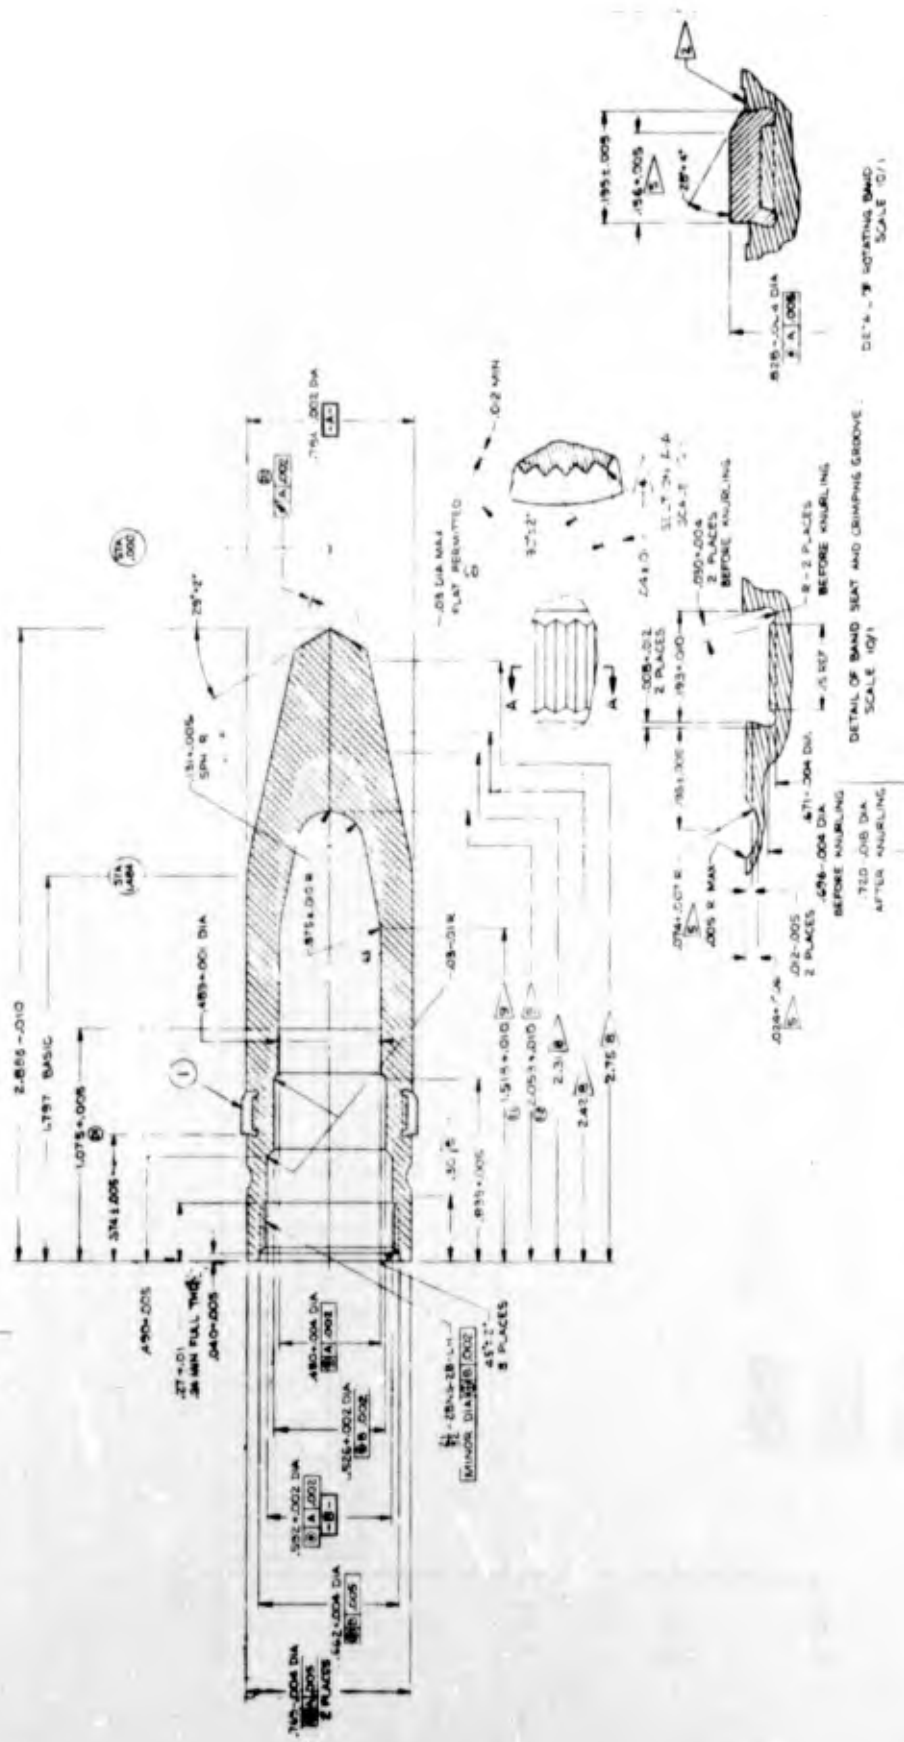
Body and Rotating Band Assembly (Cavity Test), Drawing Number 28103016
